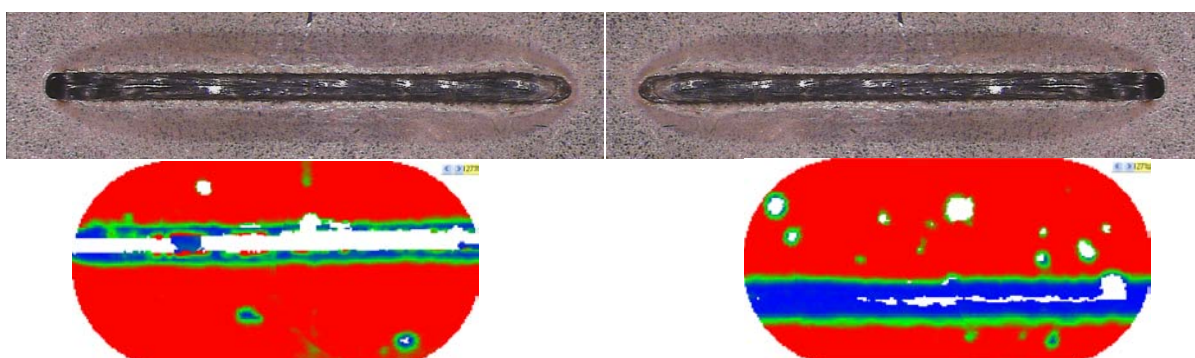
Weld top bead (0.2mm gap, sample C) and Amstech result from top bead (L) and bottom bead (R)
